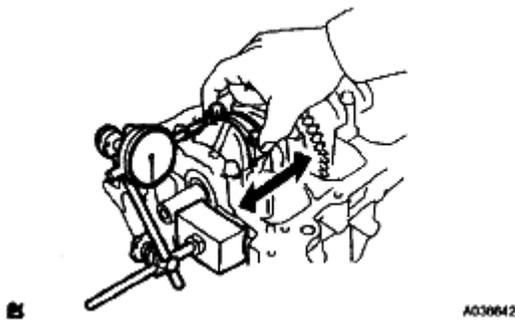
Inspecting Connecting Rod Thrust Clearance
